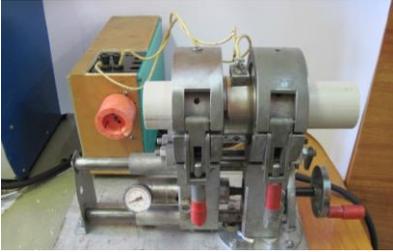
Multi-purpose device for traditional polymeric pipes hot tool butt welding equipped with the specific unit for welding within the limited volume.
